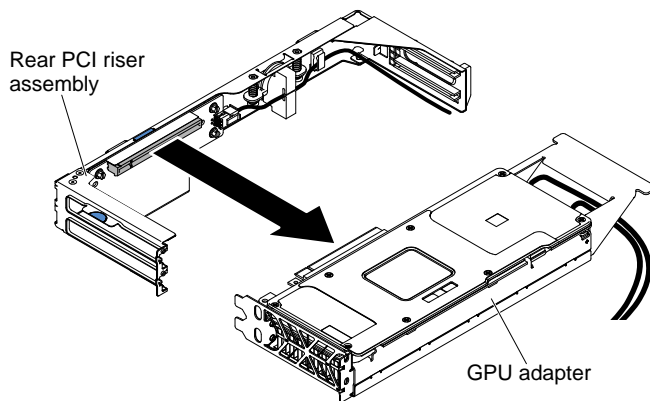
GPU adapter removal (with rear PCI riser assembly)
